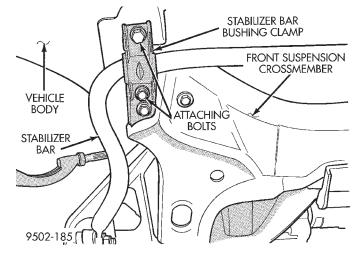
Stabilizer Bar Bushing Clamp Attachment To Vehicle
